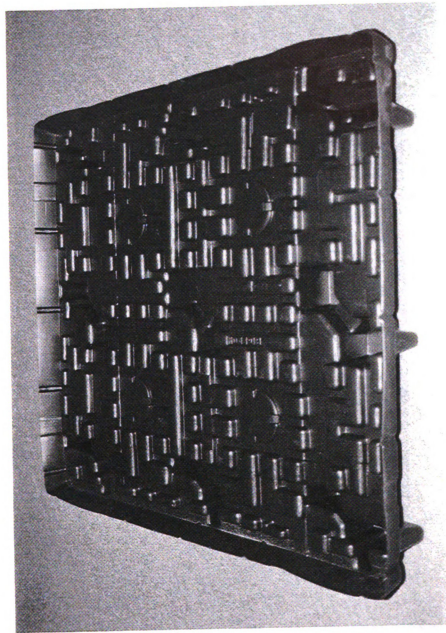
Single-Sheet Vacuum Formed Plastic Pallet (Top View)
